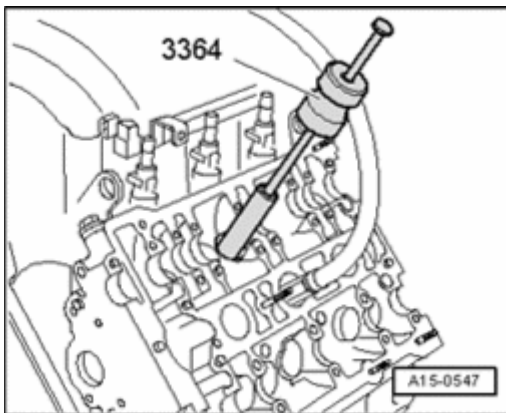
Removing Valve Stem Oil Seals Using Valve Seal Removal Tool 3364
